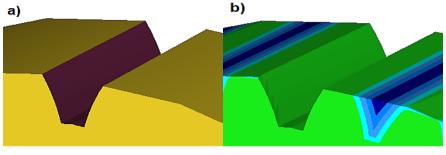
Tooth space machining simulation a) tooth space after simulation, b) comparing tooth space before and after machining [source: own study]
